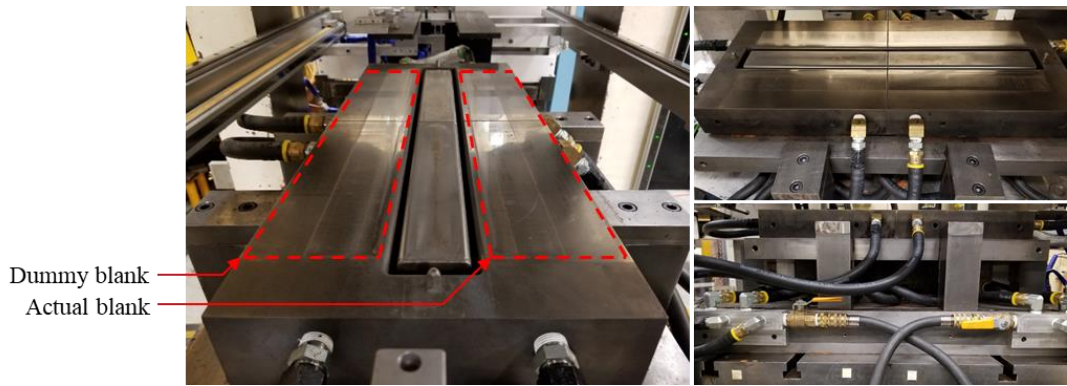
Image of lower hot stamping rail die binder, punch, and cooling tubes.
